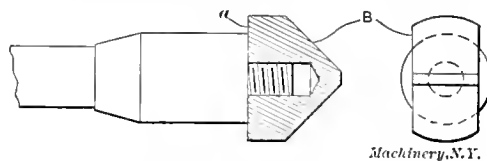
Method of Machining the Small V-blocks used as indicated in Figs. 5 and 6
